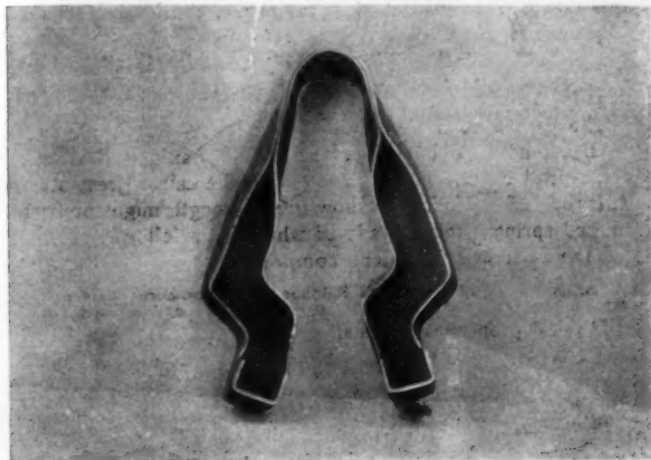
C-46-O Krupp steel chassis frame cross member. Closed on itself without showing cracks. Under shock test this steel deformed 3.03" after the fifth blow under standard conditions and the "proof" was then bent double, without showing cracks.
